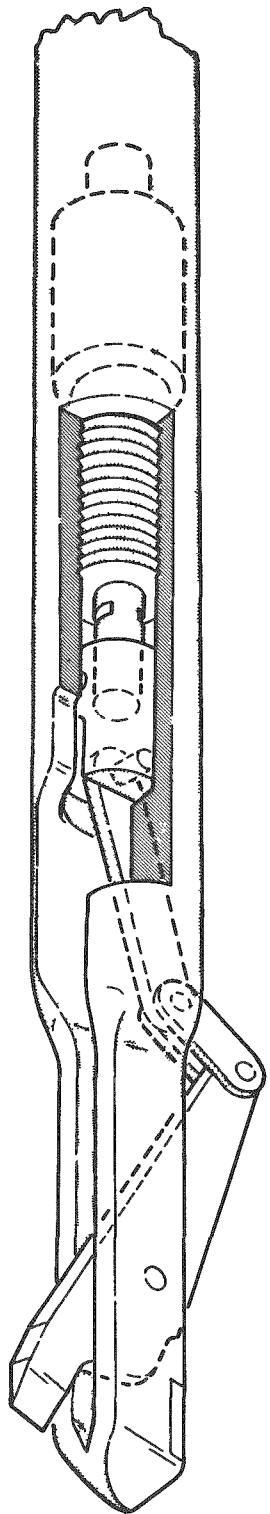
FUNCTIONAL SKETCH OF HAWK-BILL NIBBLER TOOL
